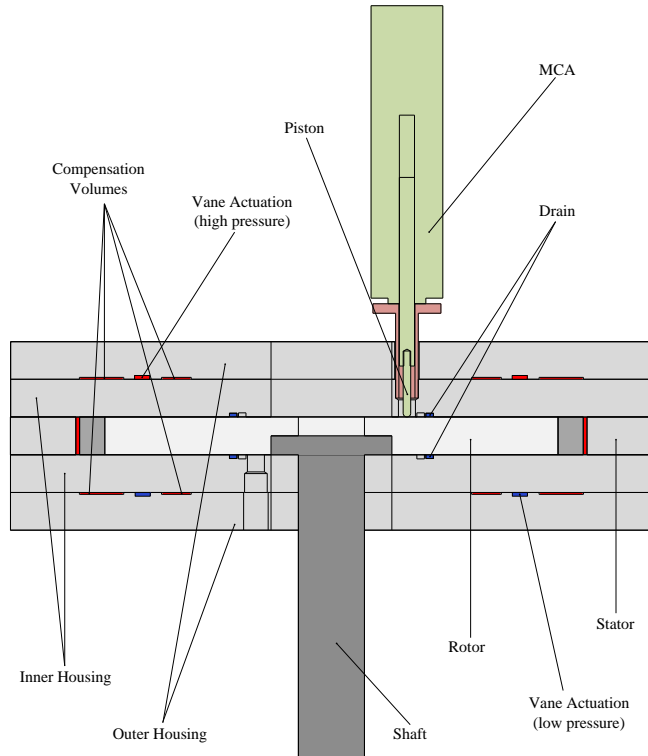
The prototype motor in a section cut with compensation volumes and the moving coil actuator mounted.
